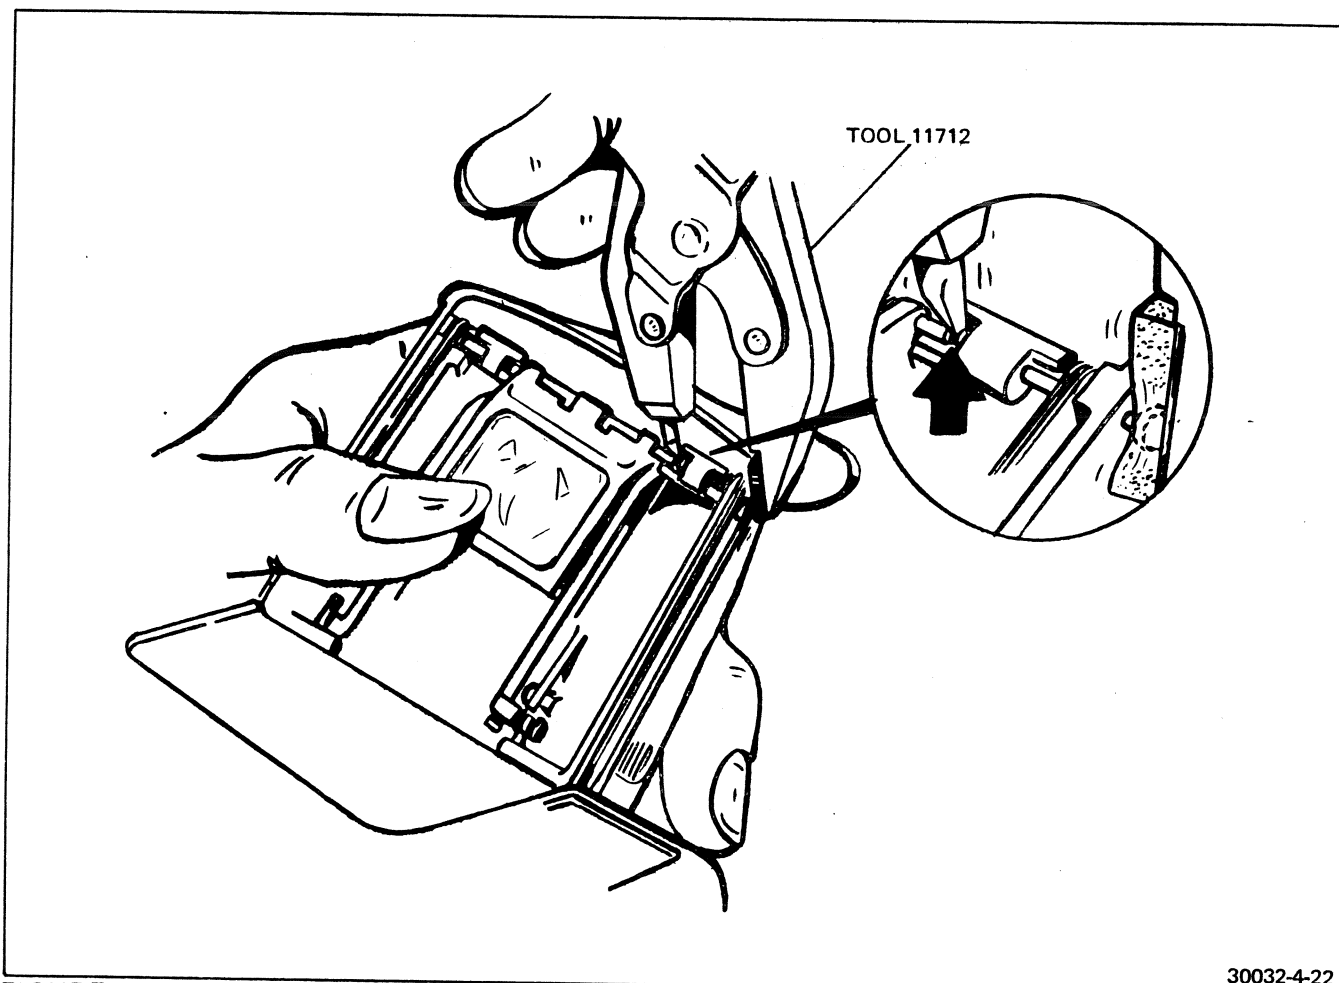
USING TOOL 11712 TO REMOVE EYELENS HINGE PIN
